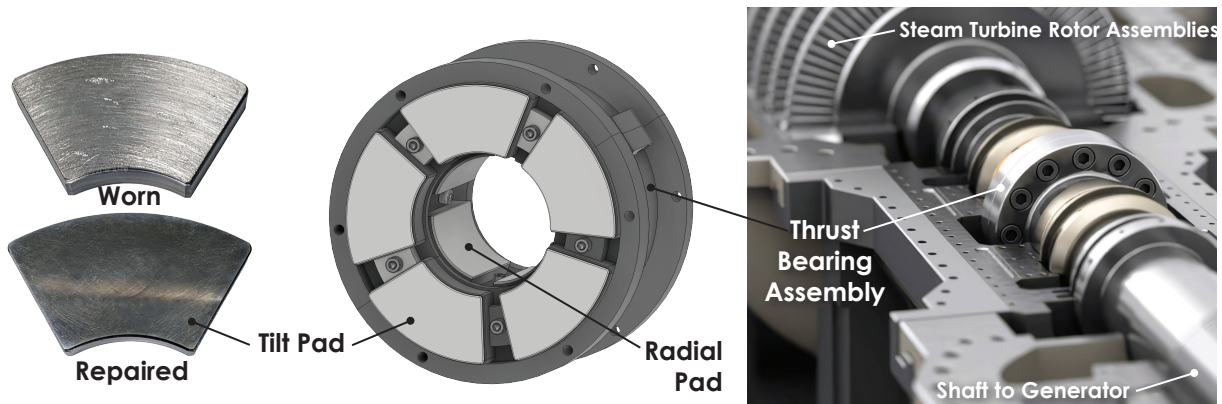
Worn and repaired tilting pads for thrust bearings (left), their location within a carrier ring thrust bearing assembly (middle), and bearing installed in a steam turbine (right)
